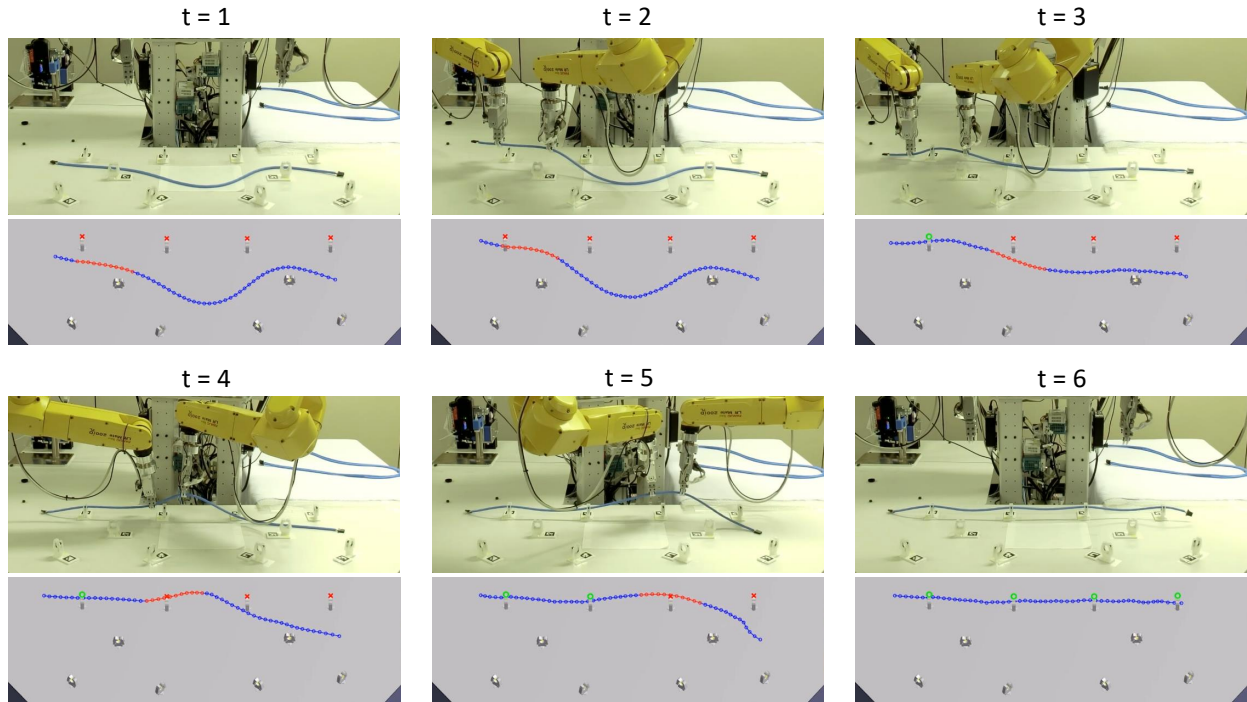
Failure detection of robotic wire harness assembly.
